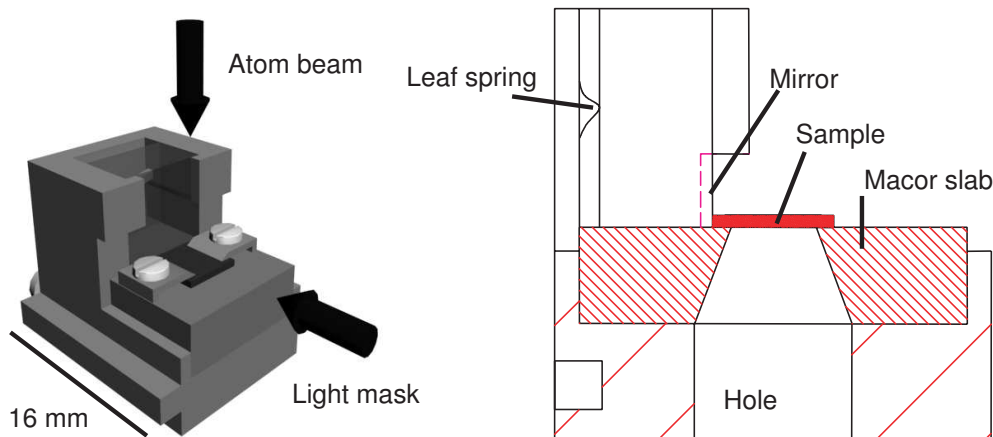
Left: sample holder. Right: Cross section of sample holder. The sample is clamped to a macor isolator that is screwed onto the steel frame. The mirror is pressed to the frame by a spring.
